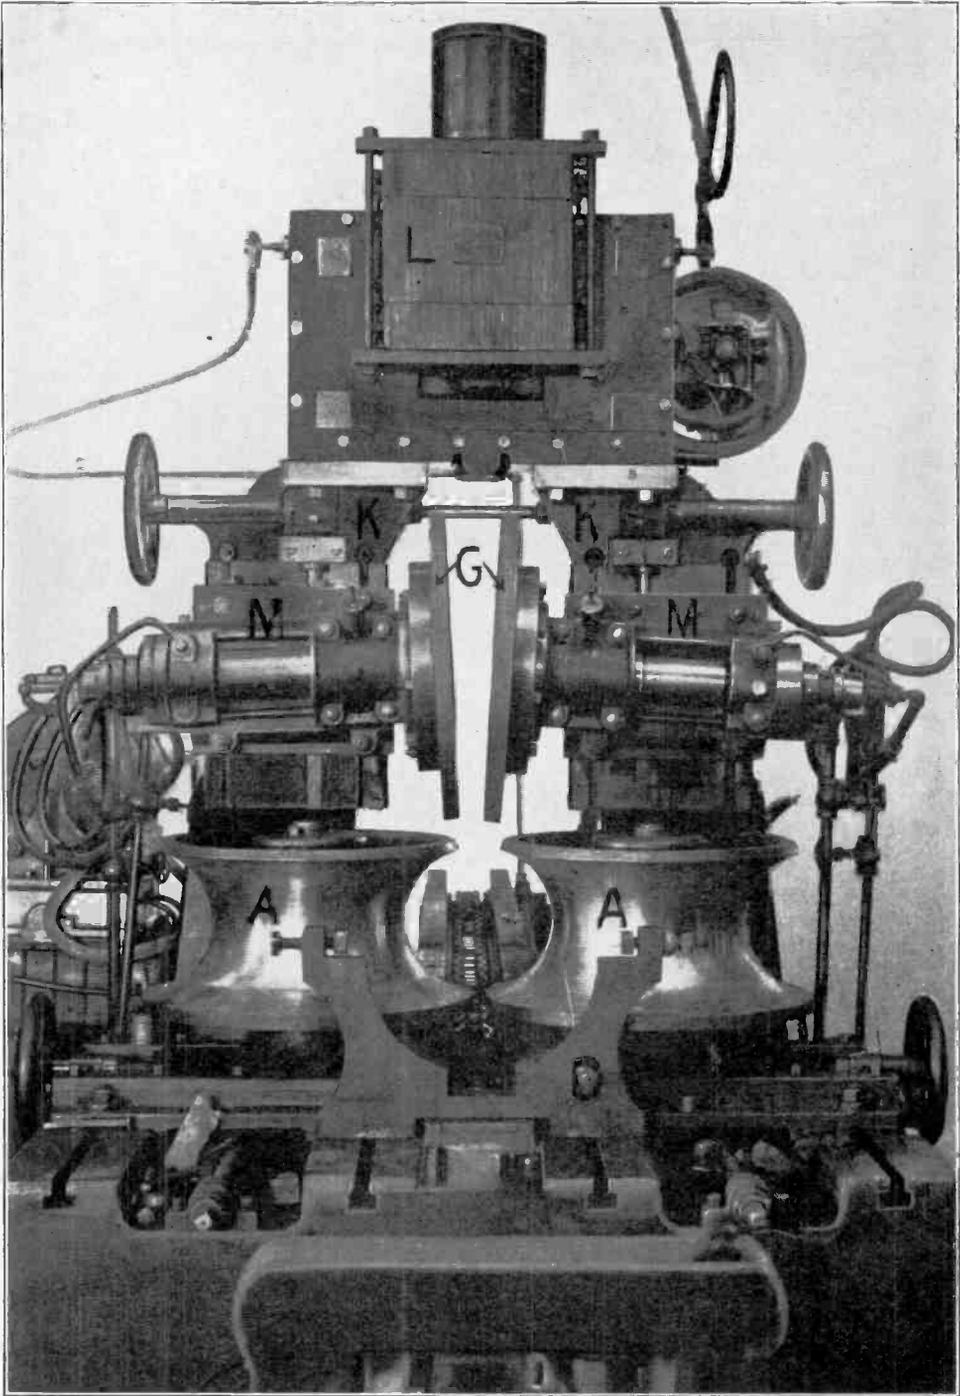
Front of Electric-Welding Machine with Yoke Removed.
